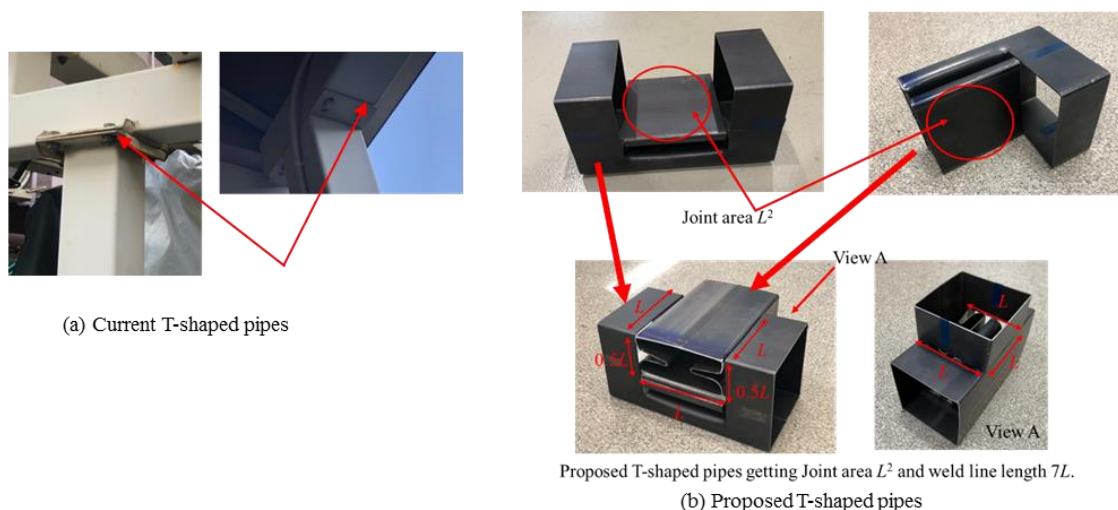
Applicable T-shaped pipes. Reinforcing materials such as flange plates are often used on current T-shaped pipes.
